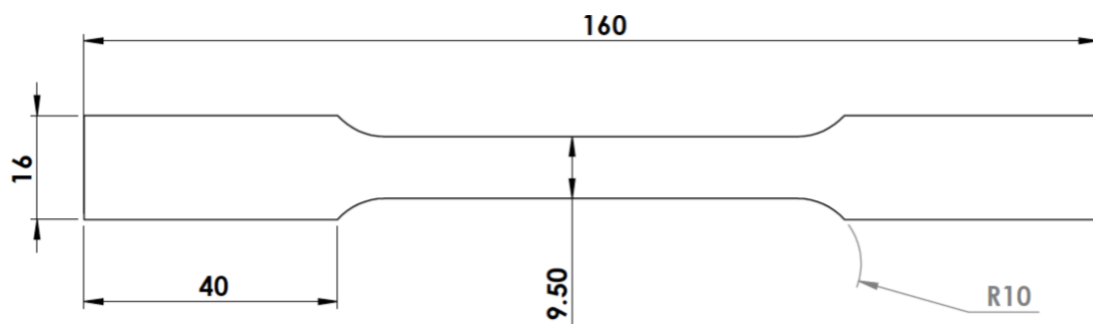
Geometry and dimensions of the uniaxial quasi-static tensile tests' specimens (all dimensions in millimeters).
